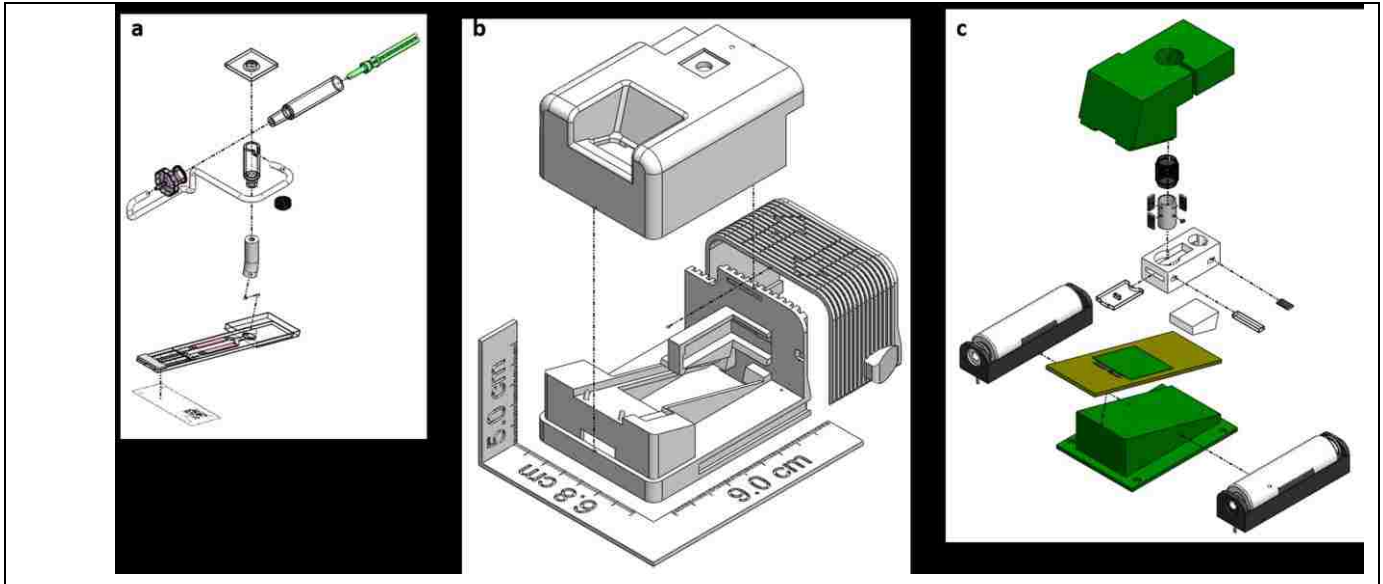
Exploded view of one of four identical MAD NAAT prototypes. (a) Fluid path components, including fluid storage and introduction syringe, sample chamber, and 2DPN. (b) Housing components: base, lid, and slider. (c) Supporting components, including electronics, valves, batteries, and insulation.
